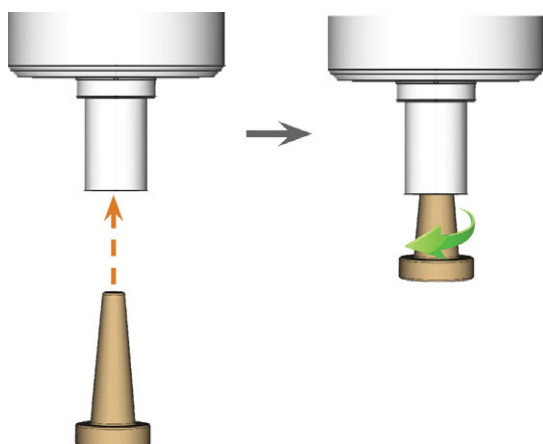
CLEANING THE INNER CONE OF THE SPINDLE
